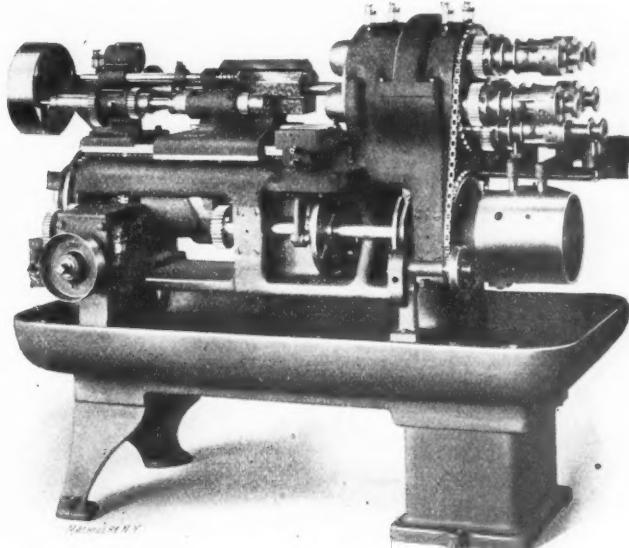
Rear View, showing the Cam-shaft Drive, and the Operating Mechanism.
